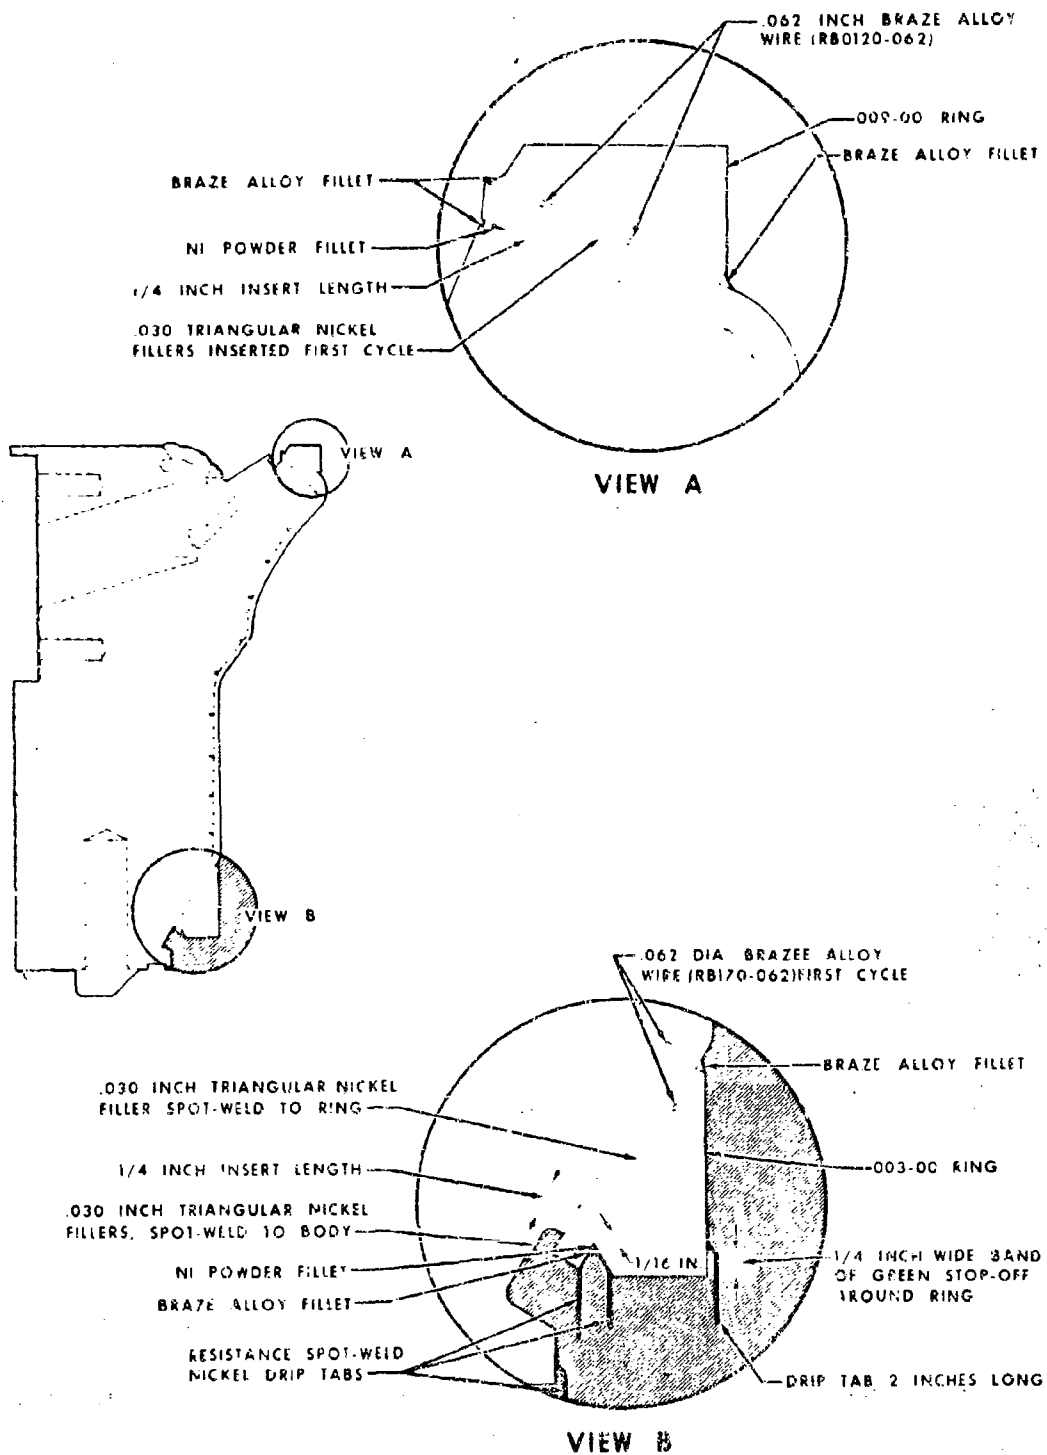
Location of Nickel Filler Metal and 90Ag-10Pd Braze Alloy Application For the First Braze Cycle. Also, Tube-to-Tube Joints Were Alloyed Full Length of the Assembly. Braze Position was as Shown Above. Braze Wire was Installed in All Body Alloy Grooves
